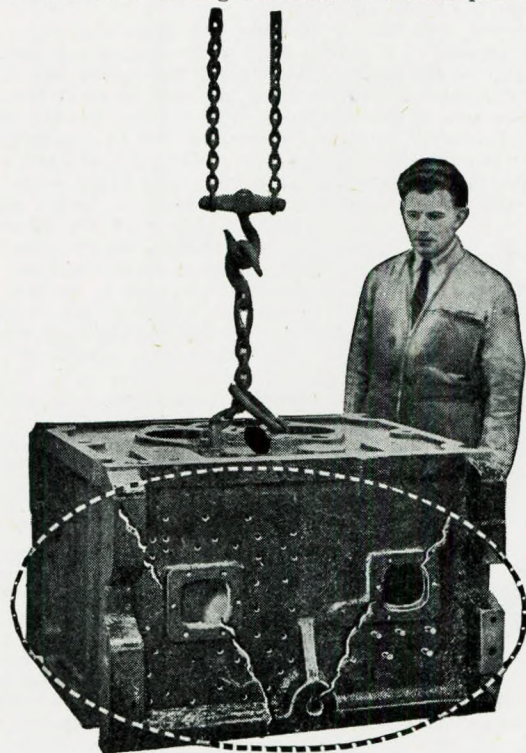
One of six cylinder covers of a well-known make of marine Diesel engine, all of which were cracked on the water jackets. The crack on this cover commenced at the top corners of one side of the jacket and then ran diagonally across the flanges of the mud holes, forming an irregular "V".
